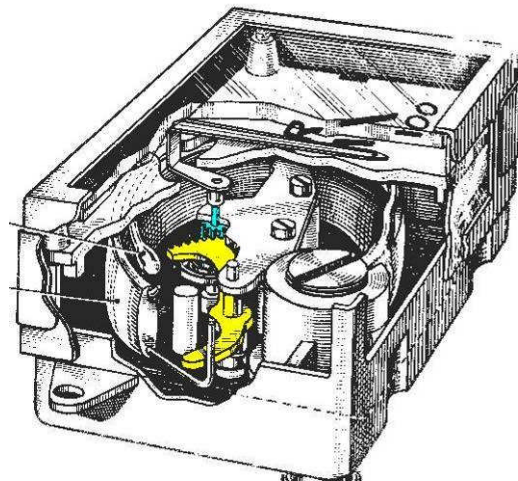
Exploded view of a "PL" type gauge mechanism.
